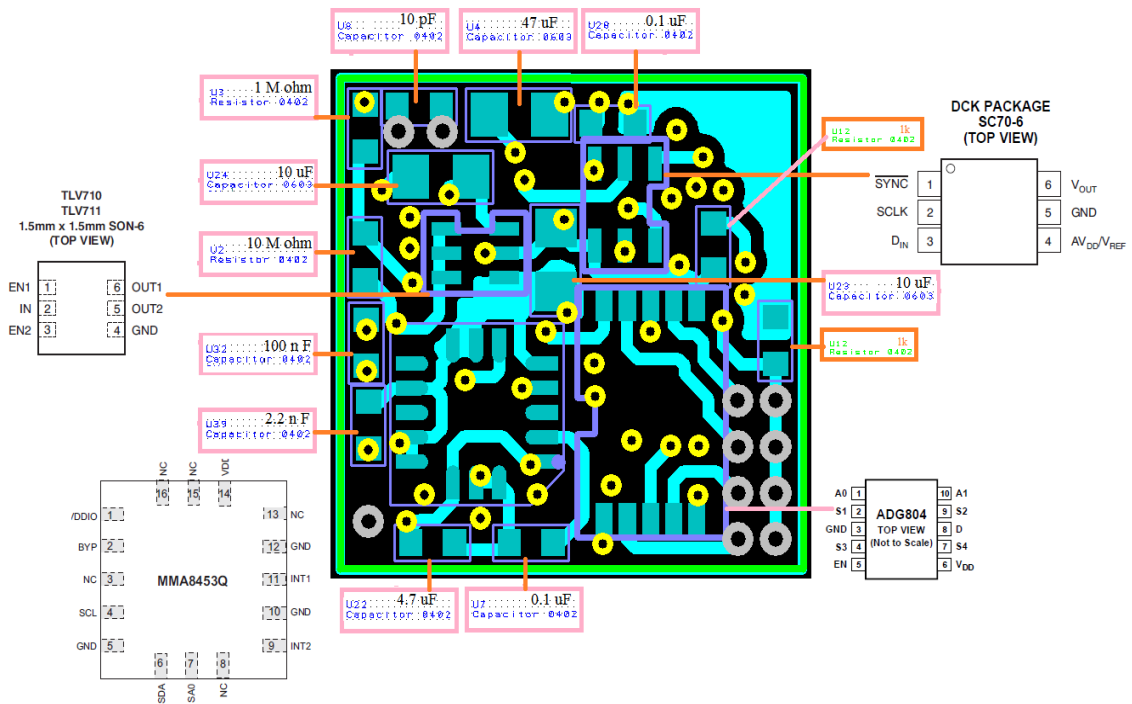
Components placed in the Bottom Layer PCB Layout of the four channeled telemetry unit of dimension 10 mm x 10 mm
